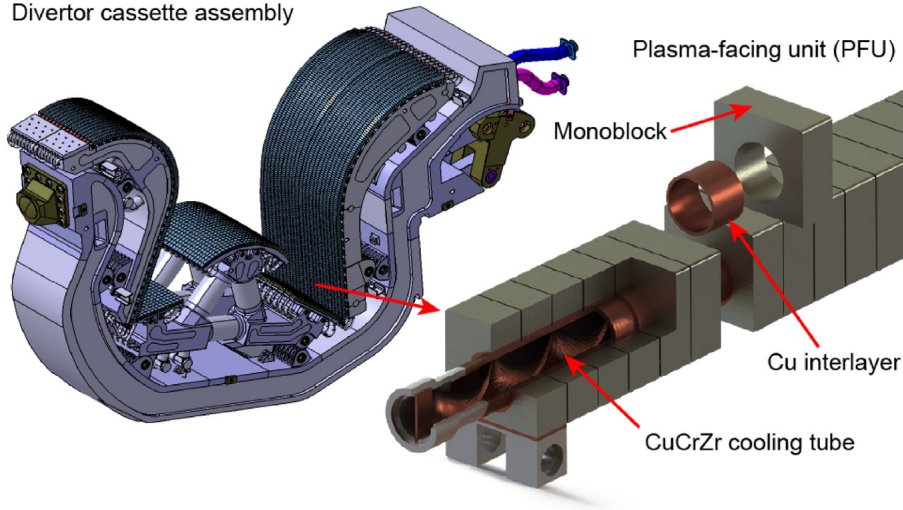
ITER divertor cassette CAD model with the tungsten monoblock and CuCrZr cooling swirl tube pipes close up. Courtesy of [30].
